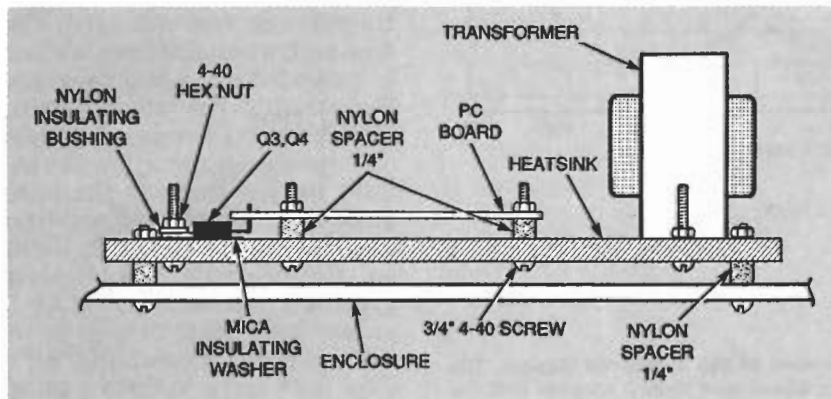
TRANSISTORS Q3 AND Q4 are mounted from the foil side of the board and bent to make contact with the heatsink when the circuit board is mounted on $\frac{1}{4}$ -inch spacers. Mount the transistors to the heatsink with insulating washers and bushings.
